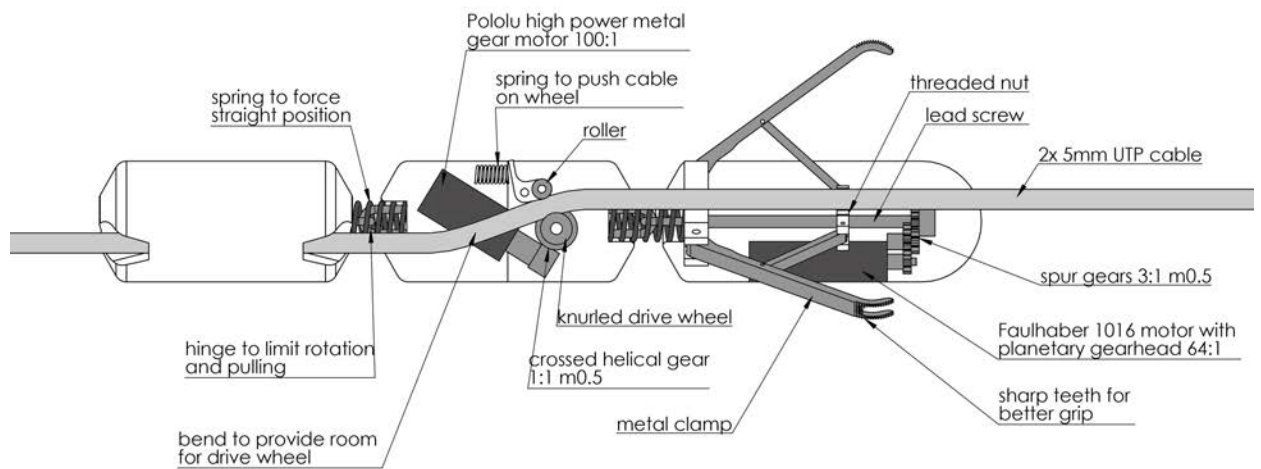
Side view of the cable feeding mechanism and clamping mechanism.
